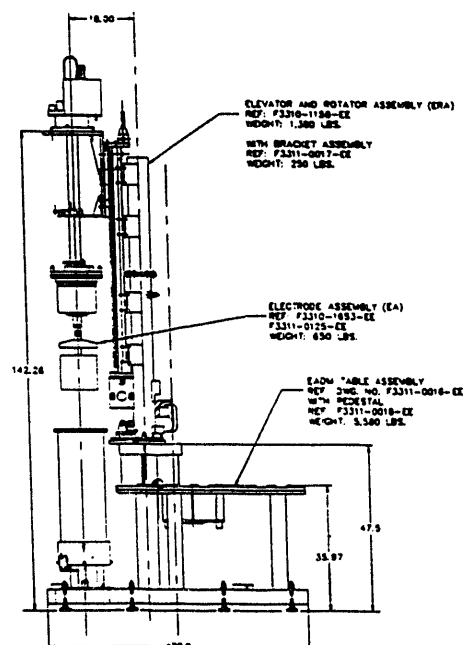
ELECTRODE ASSEMBLY AND DISASSEMBLY MACHINE
